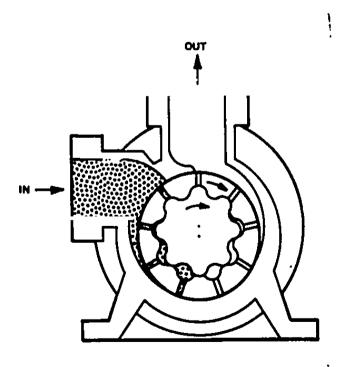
Geer-In-Geer Pump (Without Separator)
